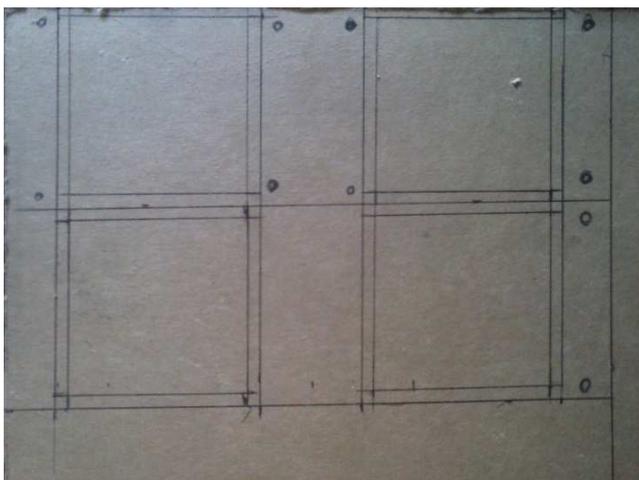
Marking out of the dimensions of the fuel cell containment on perspex.
